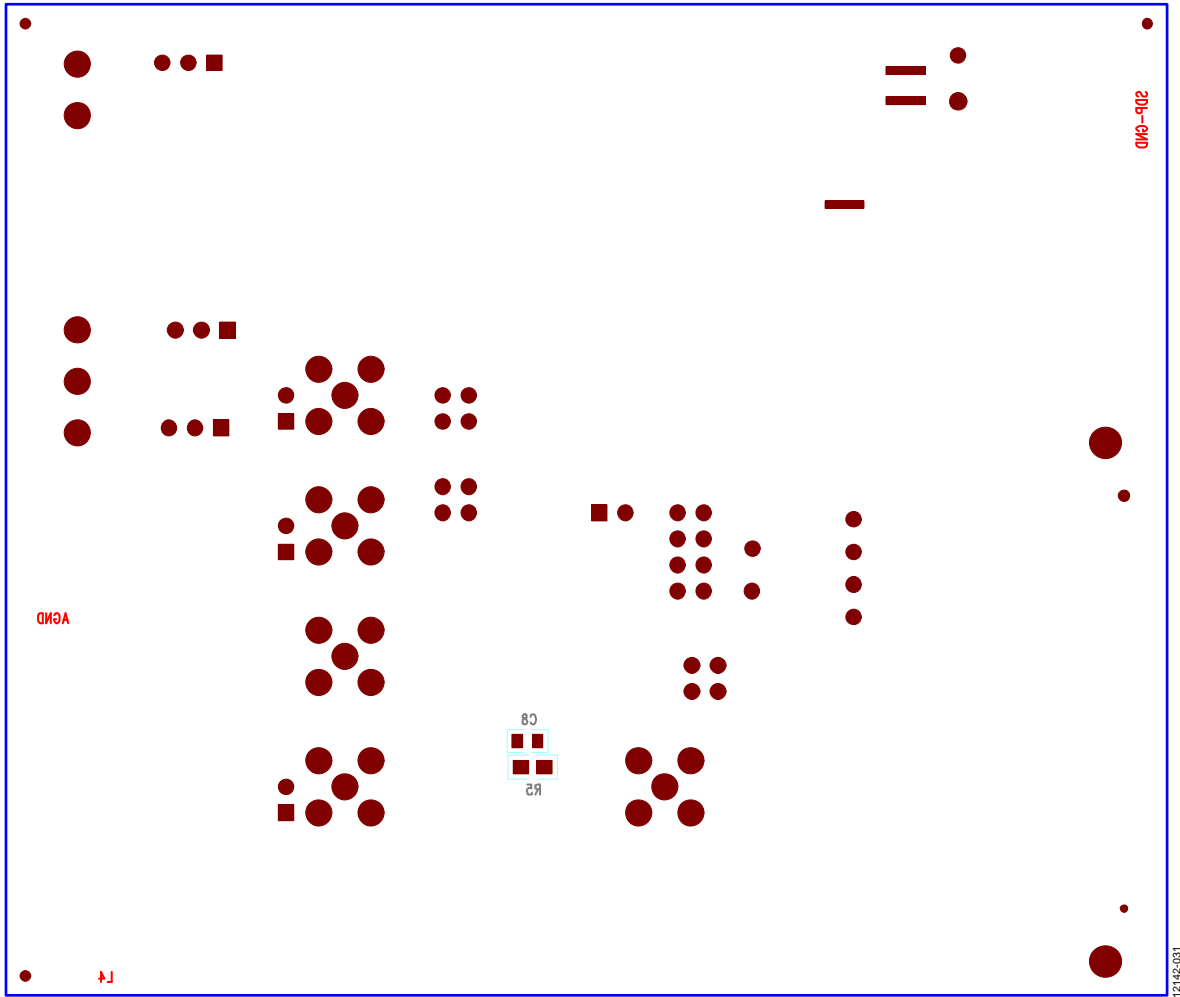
EVAL-AD7887SDZ Solder Side Silkscreen
